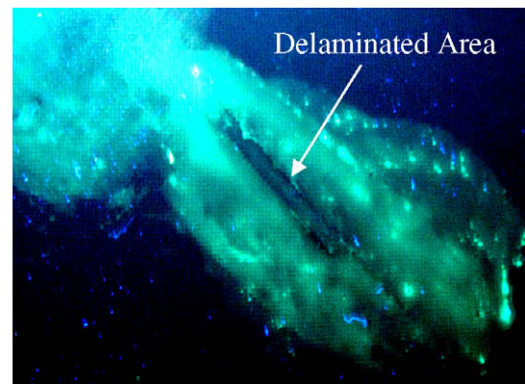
Back surface of carbon fibre composite plate under UV radiation exposure.
